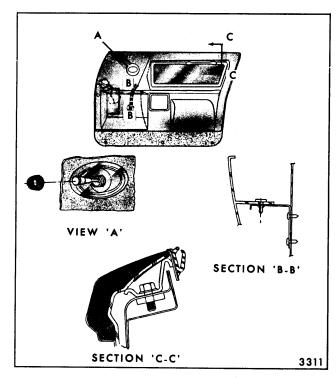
Door Trim Panel Removal - Pontiac Styles
